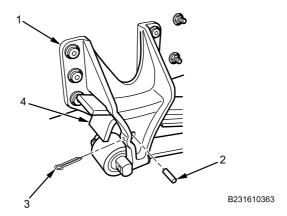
Rear Leaf Spring Front Bracket Rebound Pin.
